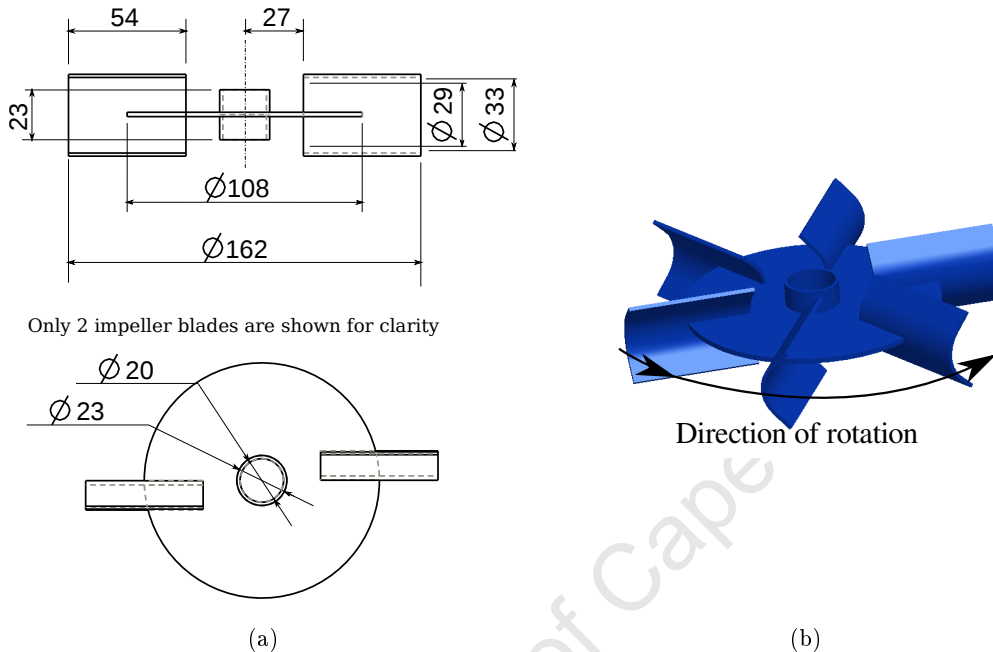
(a) Impeller dimensions, (b) Impeller
